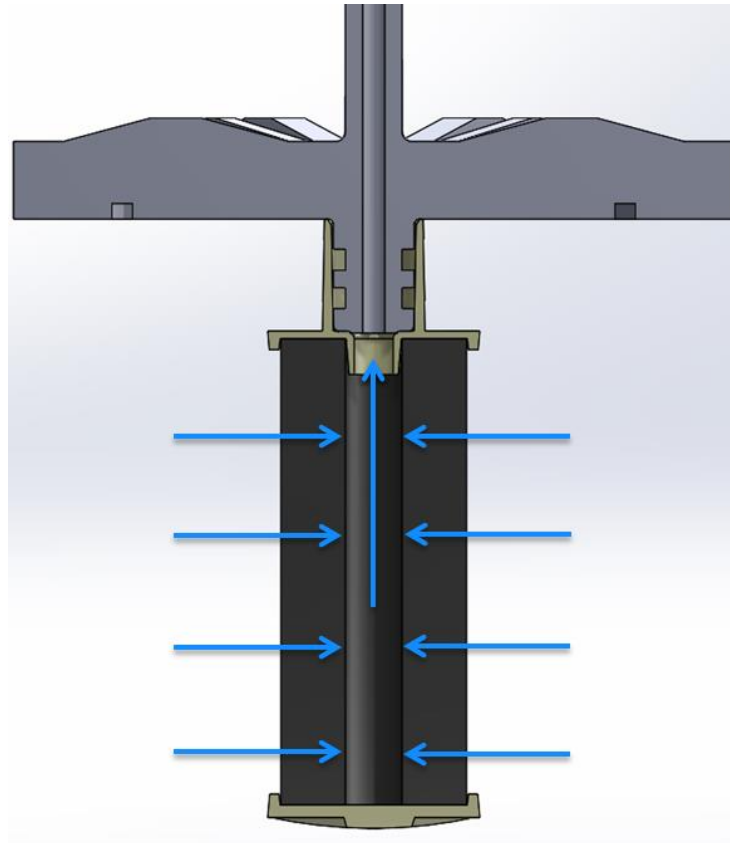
Layout of carbon block sample assembled with end caps and manifold for water test. Arrows signify direction of water flow.
